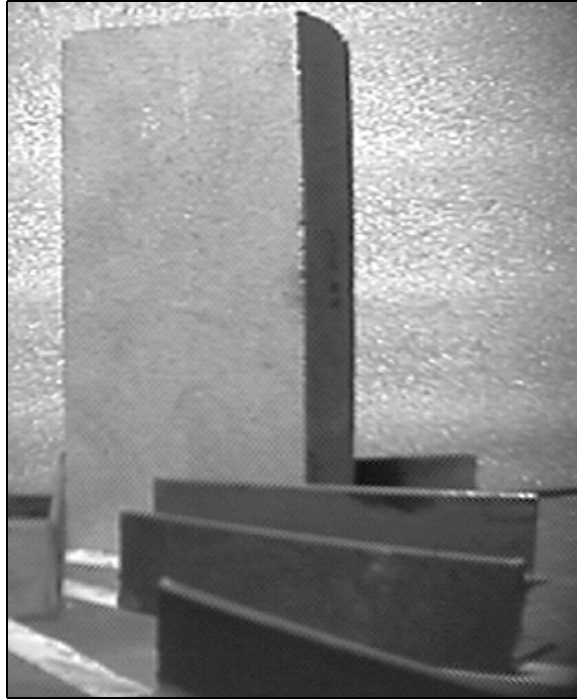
Steel plate with welded angle iron working as jig.
